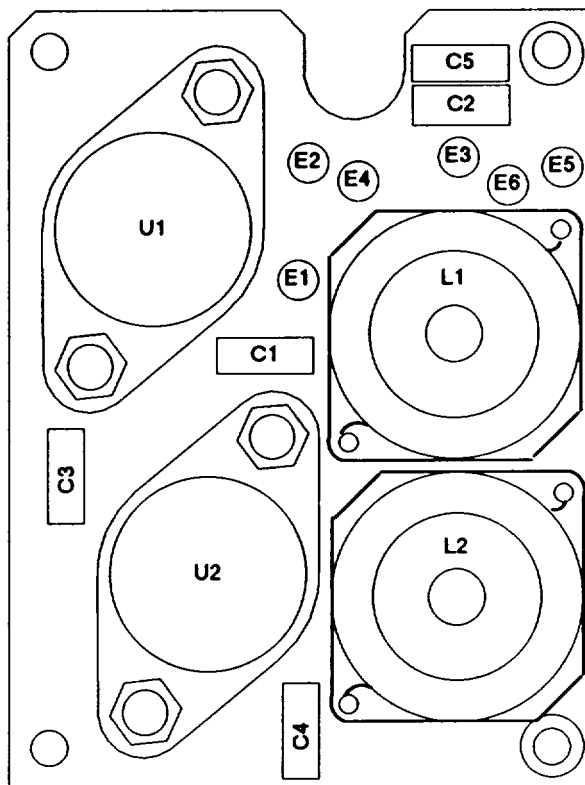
Power Supply-Module Assembly A3013338-1 (Sheet 4 of 6)
